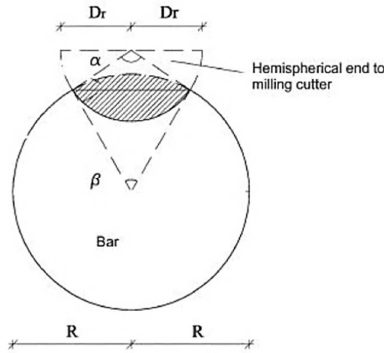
Schematic of machined defect geometry, Cairns et al. [54].
